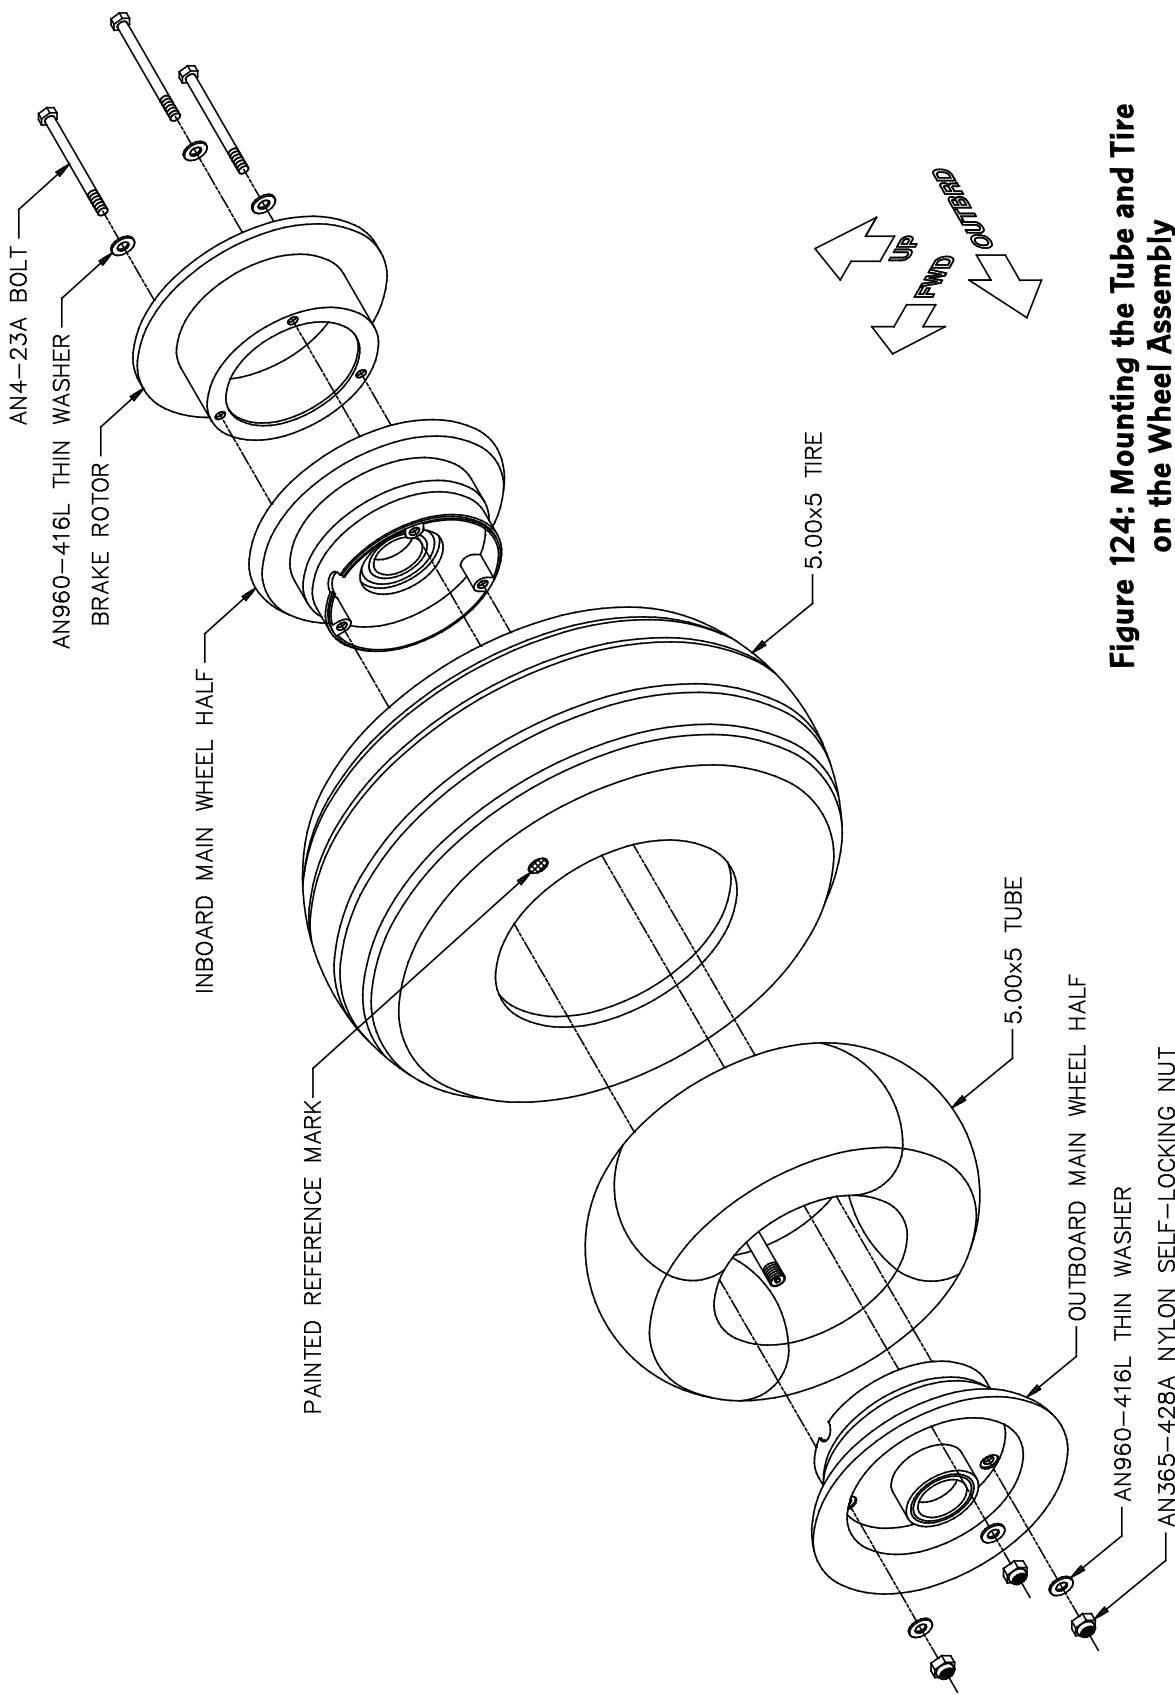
Mounting the Tube and Tire on the Wheel Assembly
